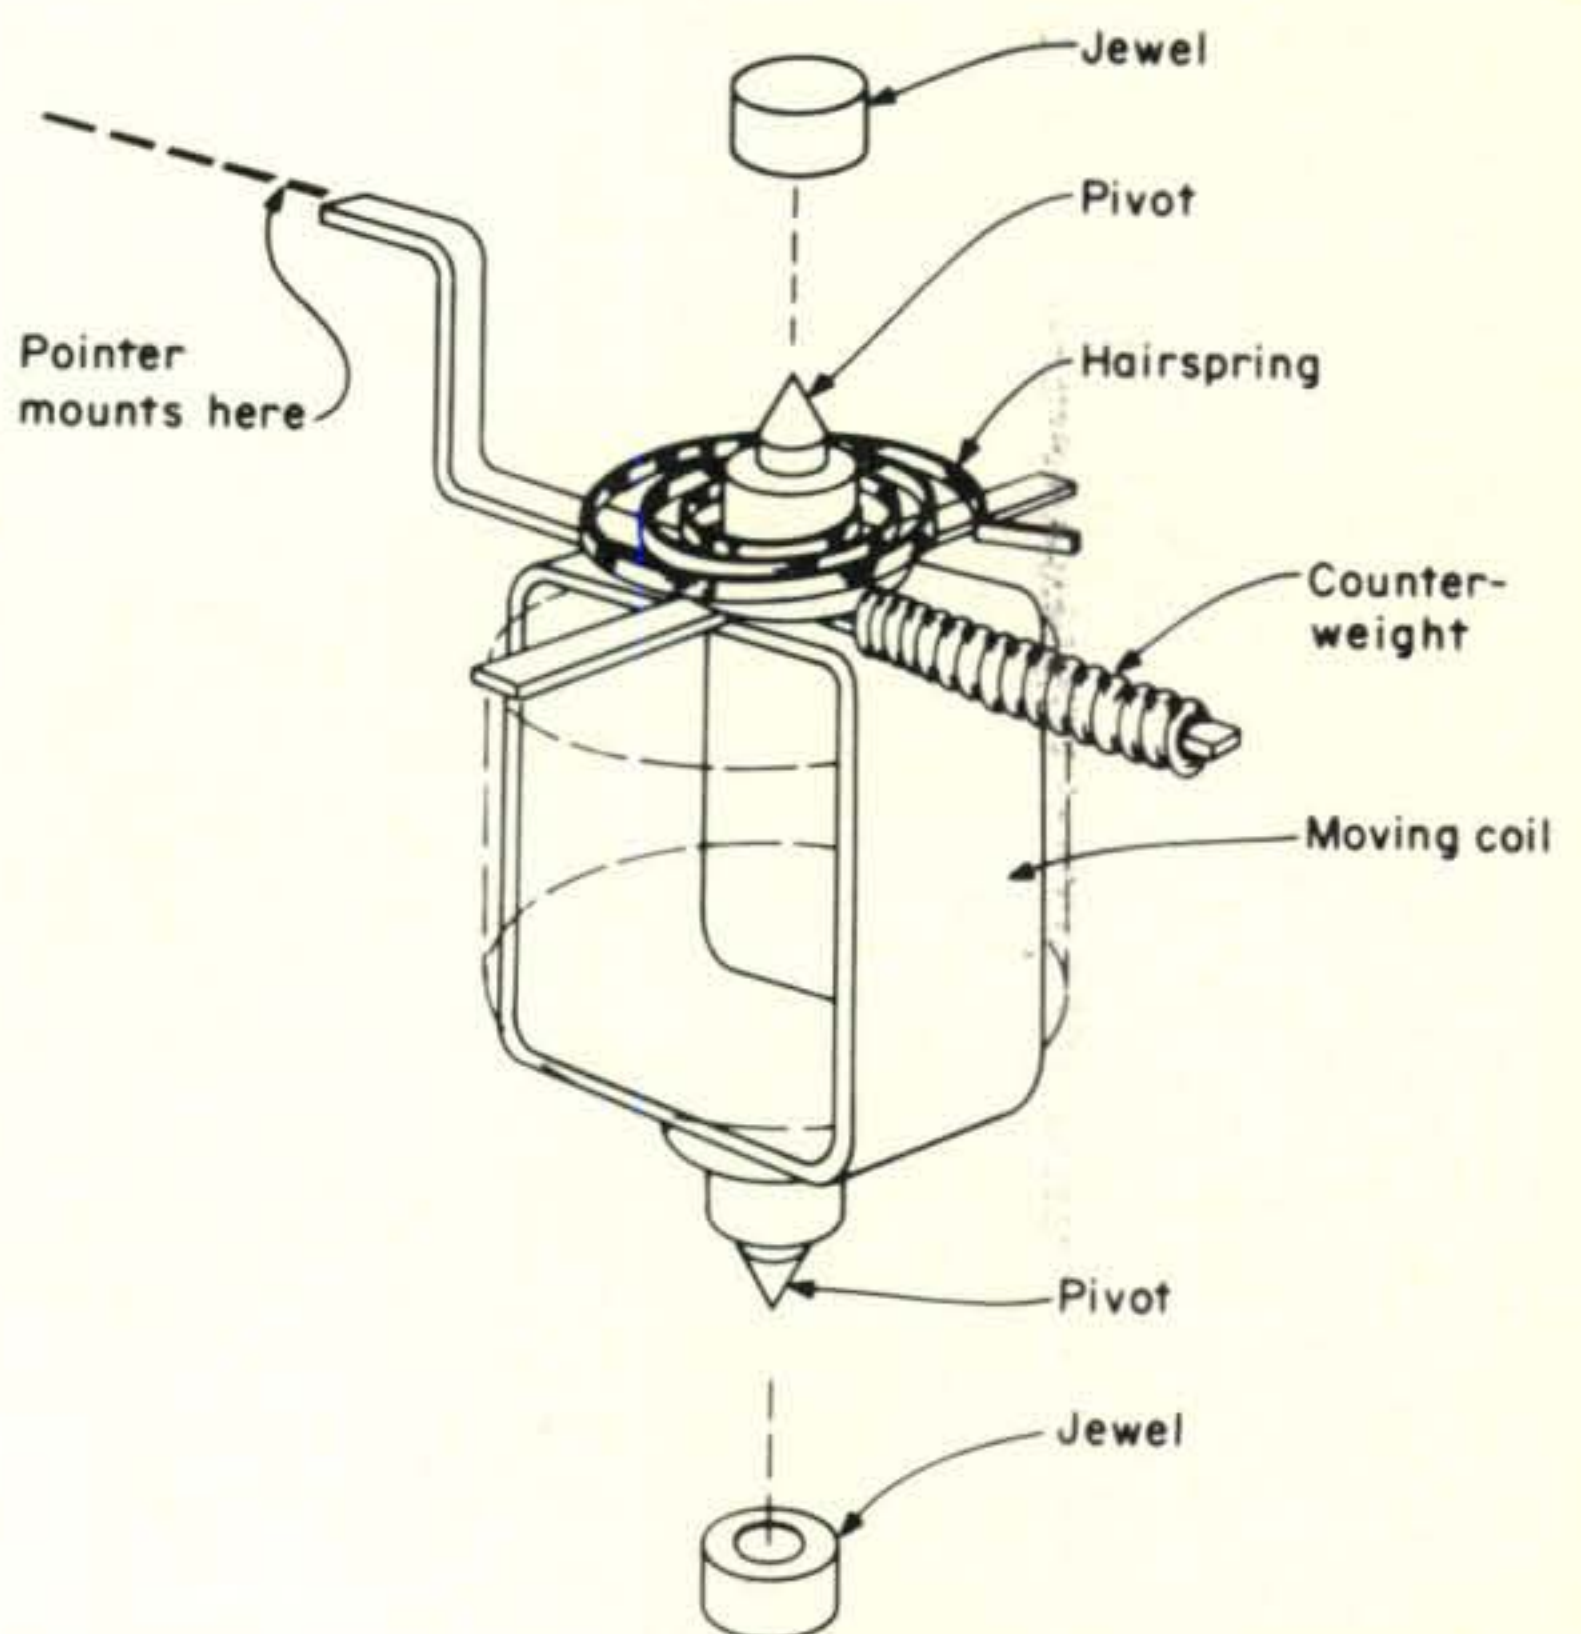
Line drawing view of the jewels, pivots, hairsprings, counterweights and moving coil.
